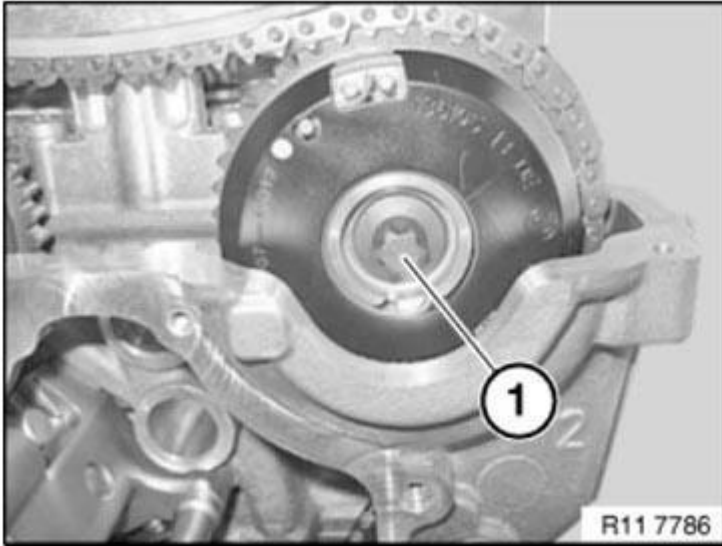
Identifying Central Bolt Of Exhaust Adjustment Unit
